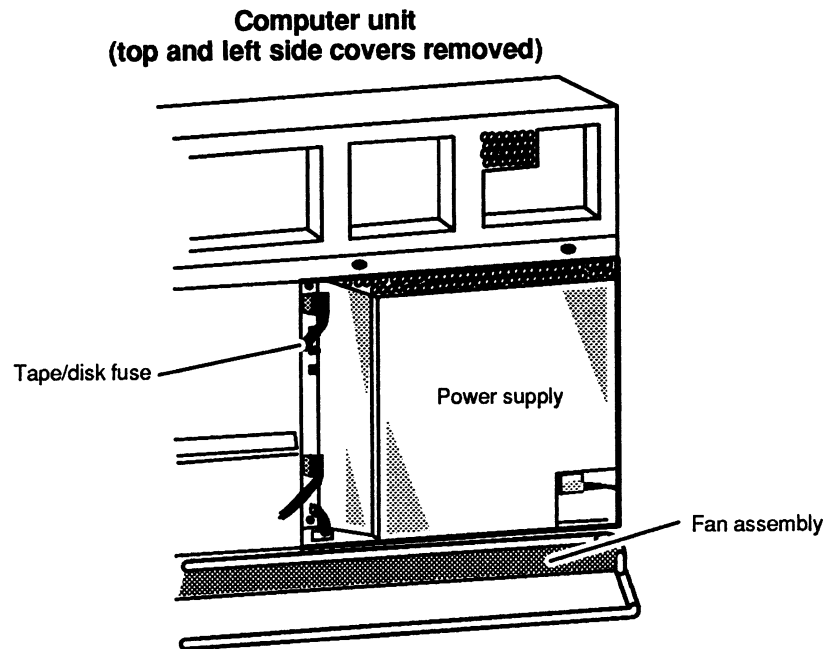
Location of Power Supply, Tape/Disk Fuse, and Fan Assembly
